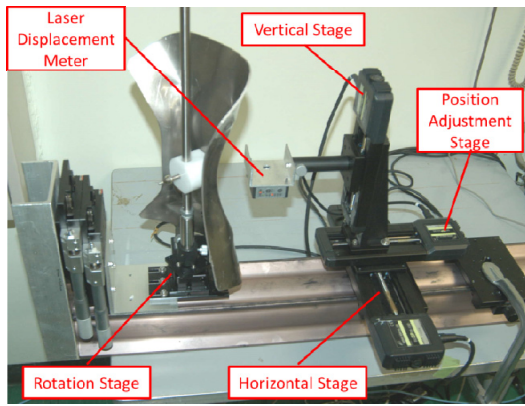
Setup for 3D shape measurement system using laser displacement meter and linear/rotary stages.
